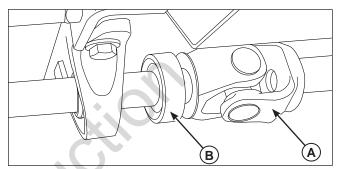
Drive Shaft A. Drive Shaft Universal Joint B. Drive Shaft Coupler
